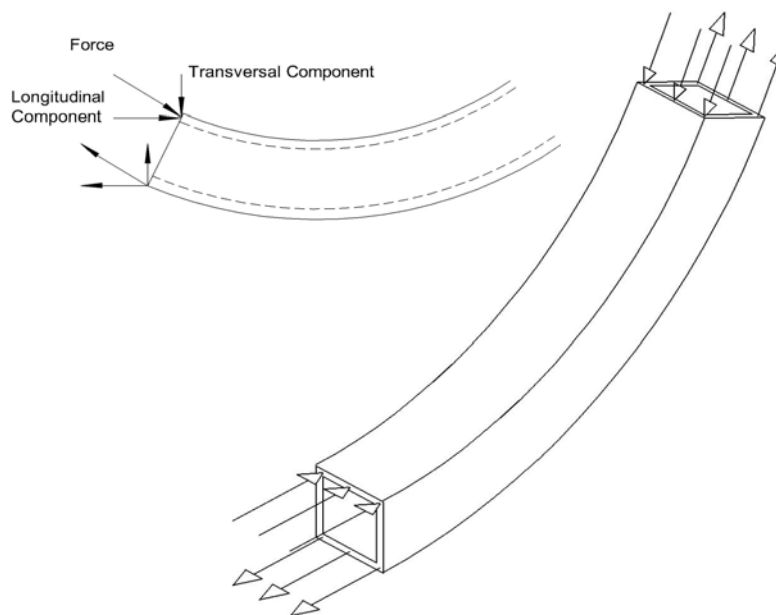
Inward crushing forces on a thin walled structure subject to bending, leading to flattening of the cross-section
